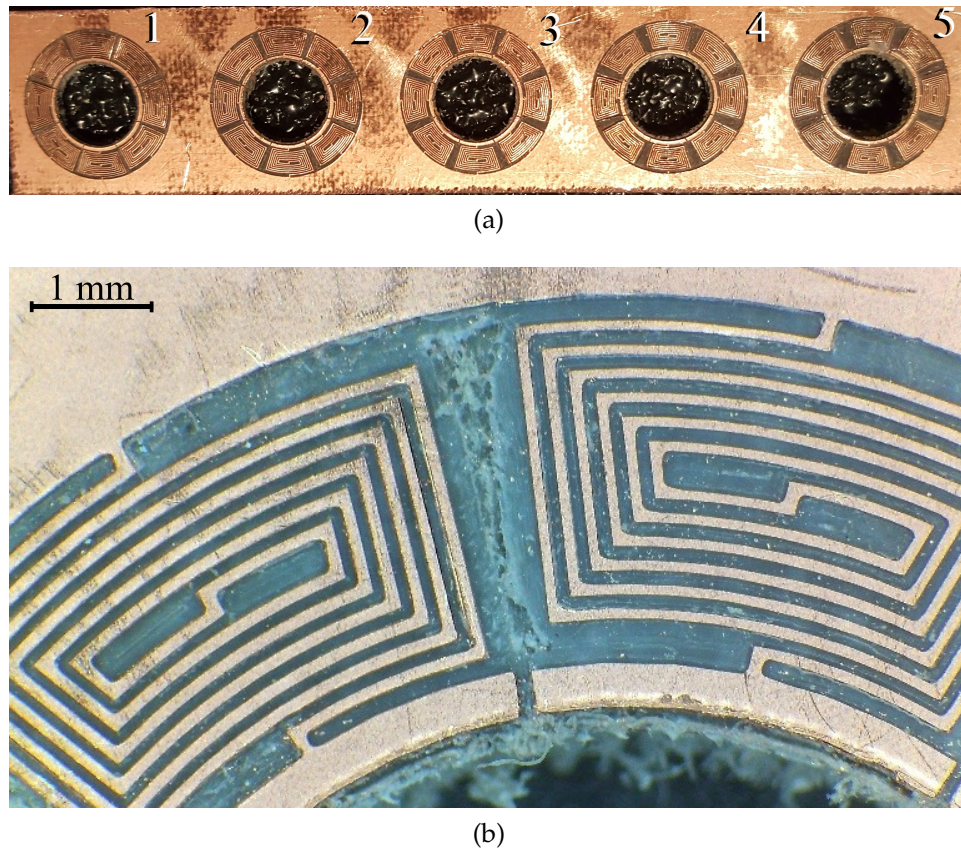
(a) Fabricated fully printed aperture array, and (b) magnified view of two adjacent dual-arm spiral inductors in a single unit cell.
